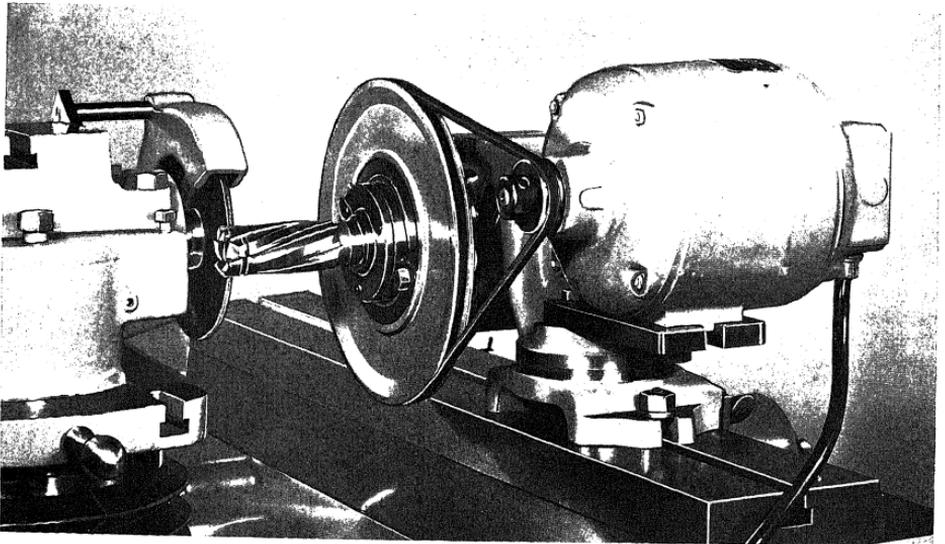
Cutting off the damaged end of a helical end mill.
